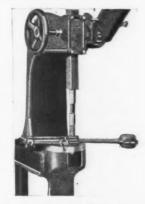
The bushing in rod is broached by using a clamp over small end rod as shown
